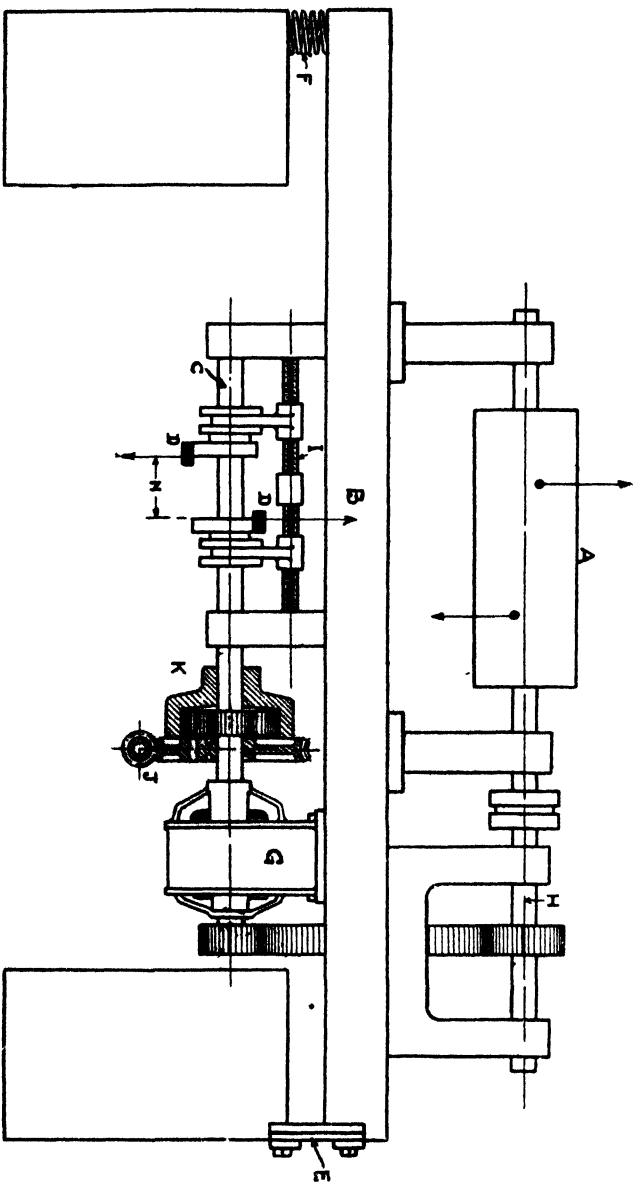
ILLUSTRATING THE PRINCIPLE OF THE CARVEN BALANCING MACHINE
